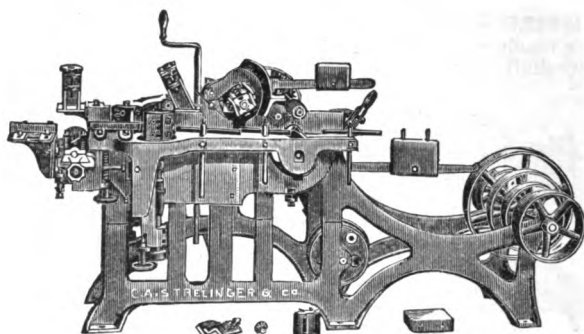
NO. 2-6 INCH FOUR-SIDED MOULDER.
